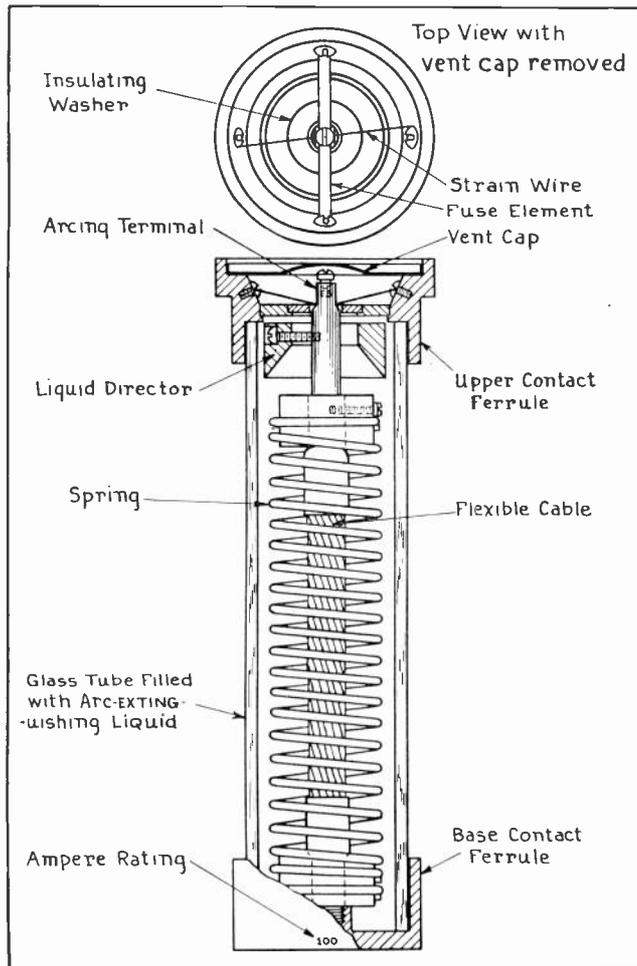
A. The above sketch shows the principal parts of a high-voltage fuse of the liquid filled type. Examine each part carefully and compare with the explanations given on these pages. Courtesy of Schweitzer & Conrad, Inc.
